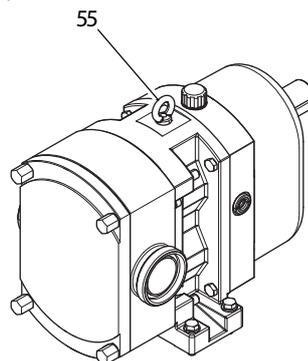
Moving with crane and eyebolt illustrated using the FL100
